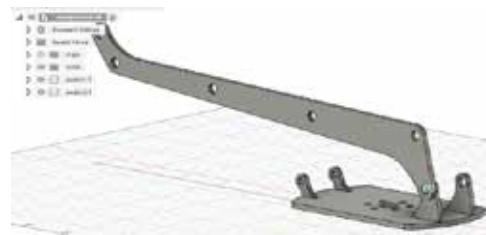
Position and dimensions of the fastening holes of the 2nd link
